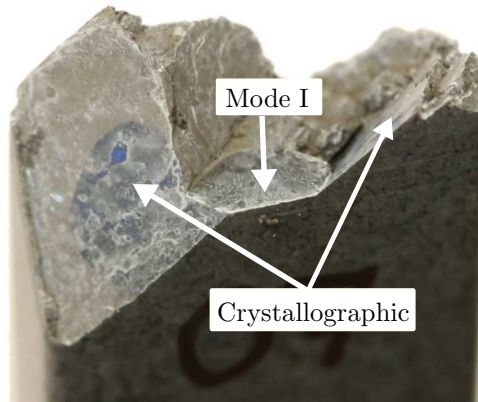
Fracture surface of a surface flawed fatigue crack growth (Kb) specimen showing the two distinct cracking modes.
